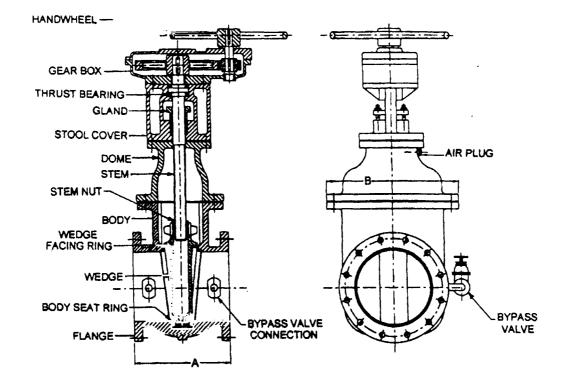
C TYPICAL SKETCH OF A SLUICE VALVE WITH BALL THRUST BEARING AND SPUR GEAR ARRANGEMENT
